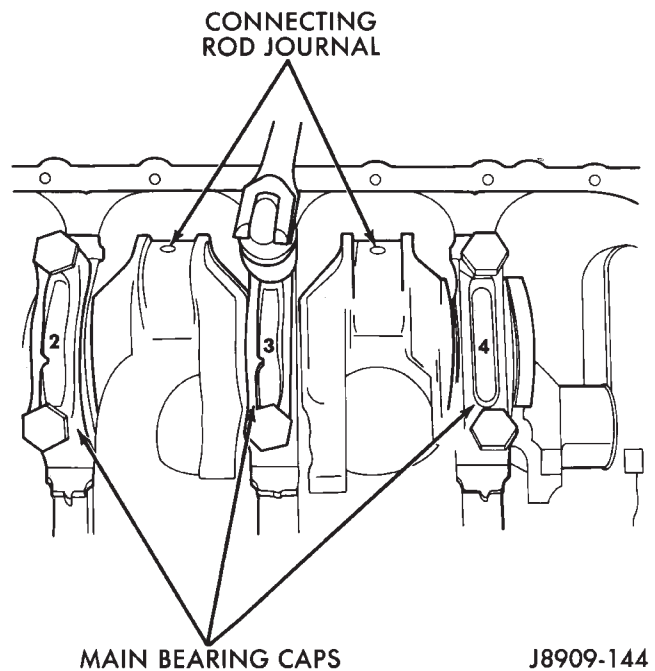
Removing Main Bearing Caps and Lower Inserts
